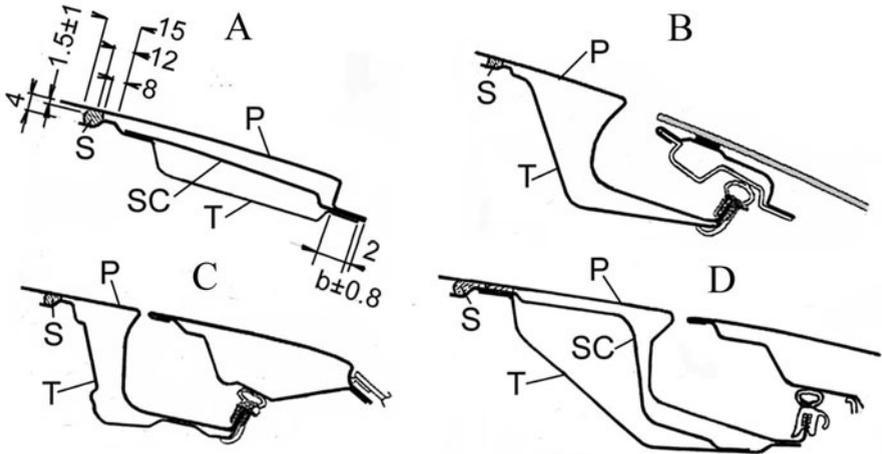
Examples of boxed rear roof cross members for car with back glass (A) and liftgate (D); open section rear roof cross members for frameless tailgate (B) and steel frame tailgate (C). S: sealant; P: roof panel; T: cross member; SC: boxing member.
